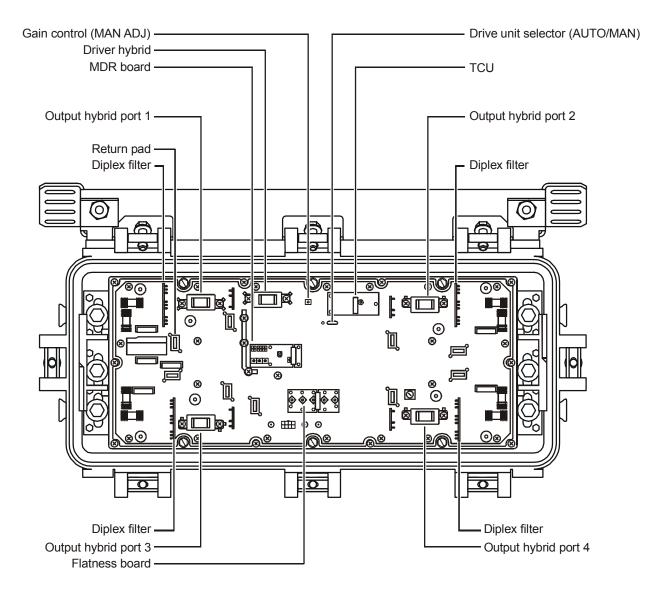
illustrates the RF chassis with the cover removed indicating the location of major components:
